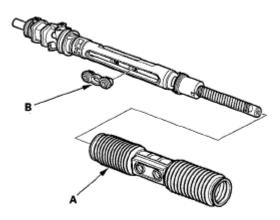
Removing Boot And Slider Guide From Cylinder Courtesy of AMERICAN HONDA MOTOR CO., INC.
